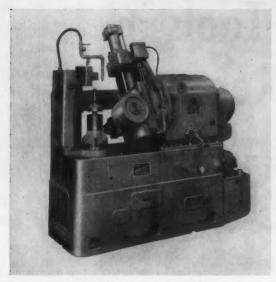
"HoBlique" hobbing machine for the mass production of helical gears
